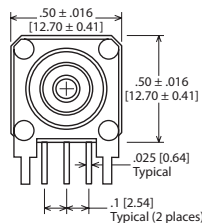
B24-22: Concentric Shafts, B22, 3 Potentiometer(s) or RS + MP, 3/8" Bushing
